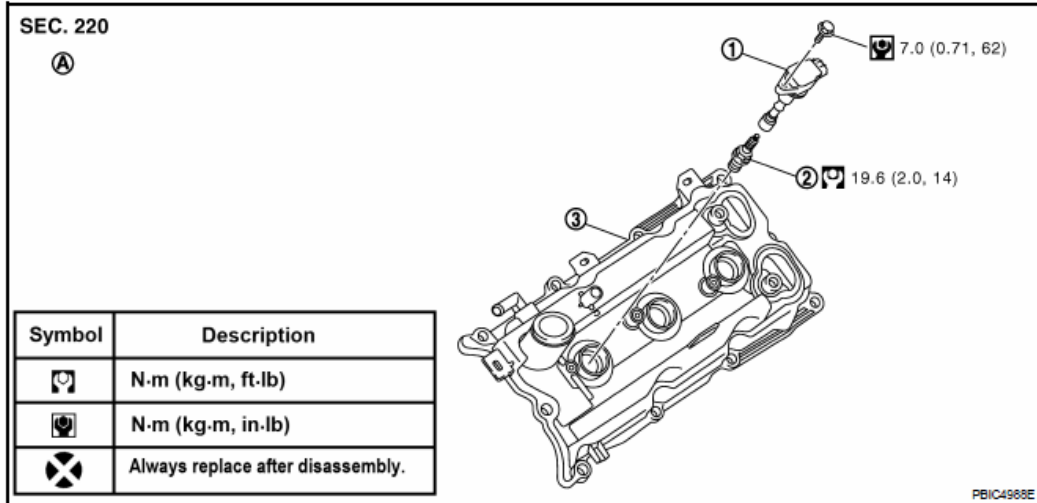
Identifying Spark Plug Components (Iridium-Tipped Type)
